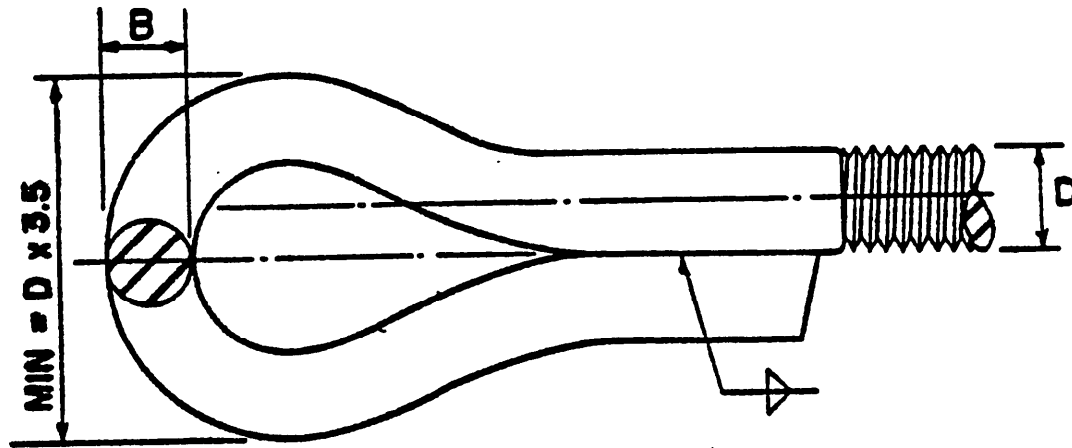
Arc- or gas-welded-eye end pull.
